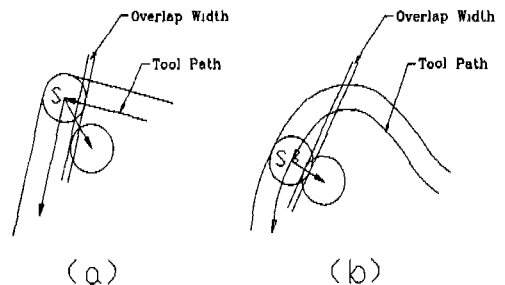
Tool Movement between Two Adjacent Tool Paths
